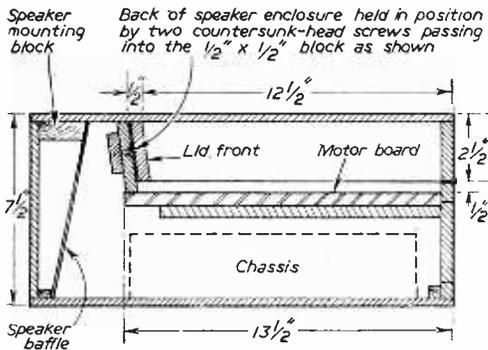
Longitudinal cross-section of the cabinet showing full details of the construction.
